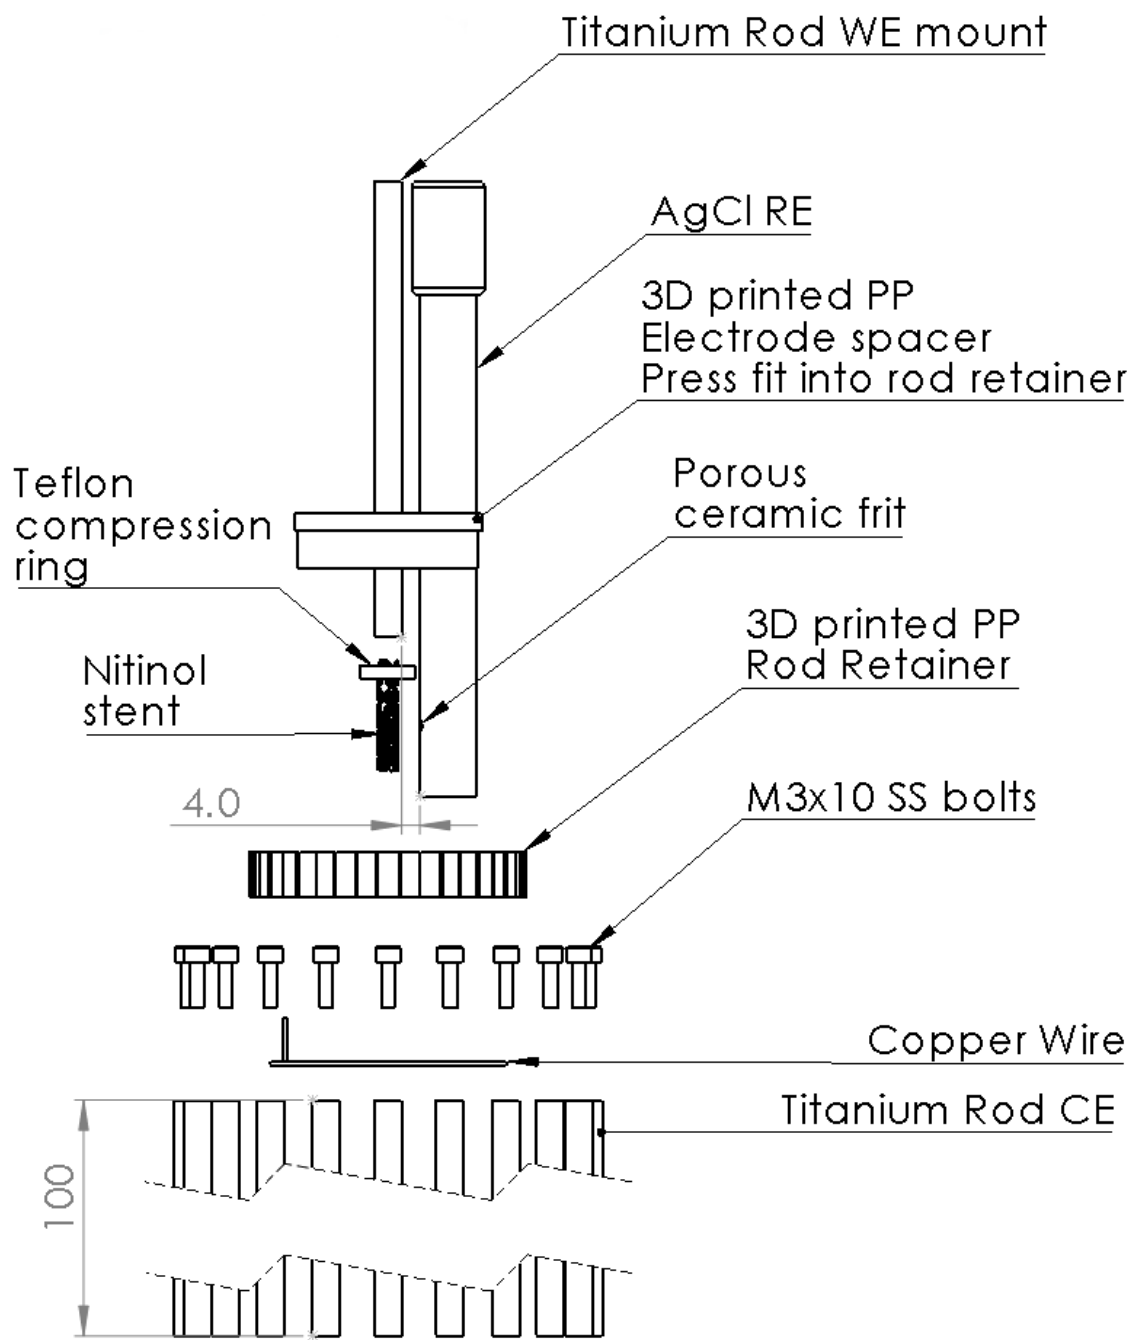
Exploded view of electrode components (all dimensions in mm)
